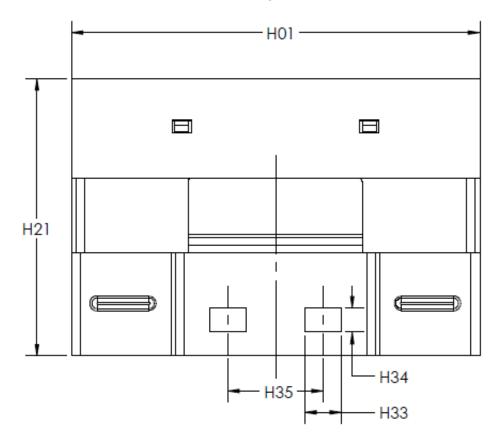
4X PLUG PADDLE CARD DIMENSIONS
